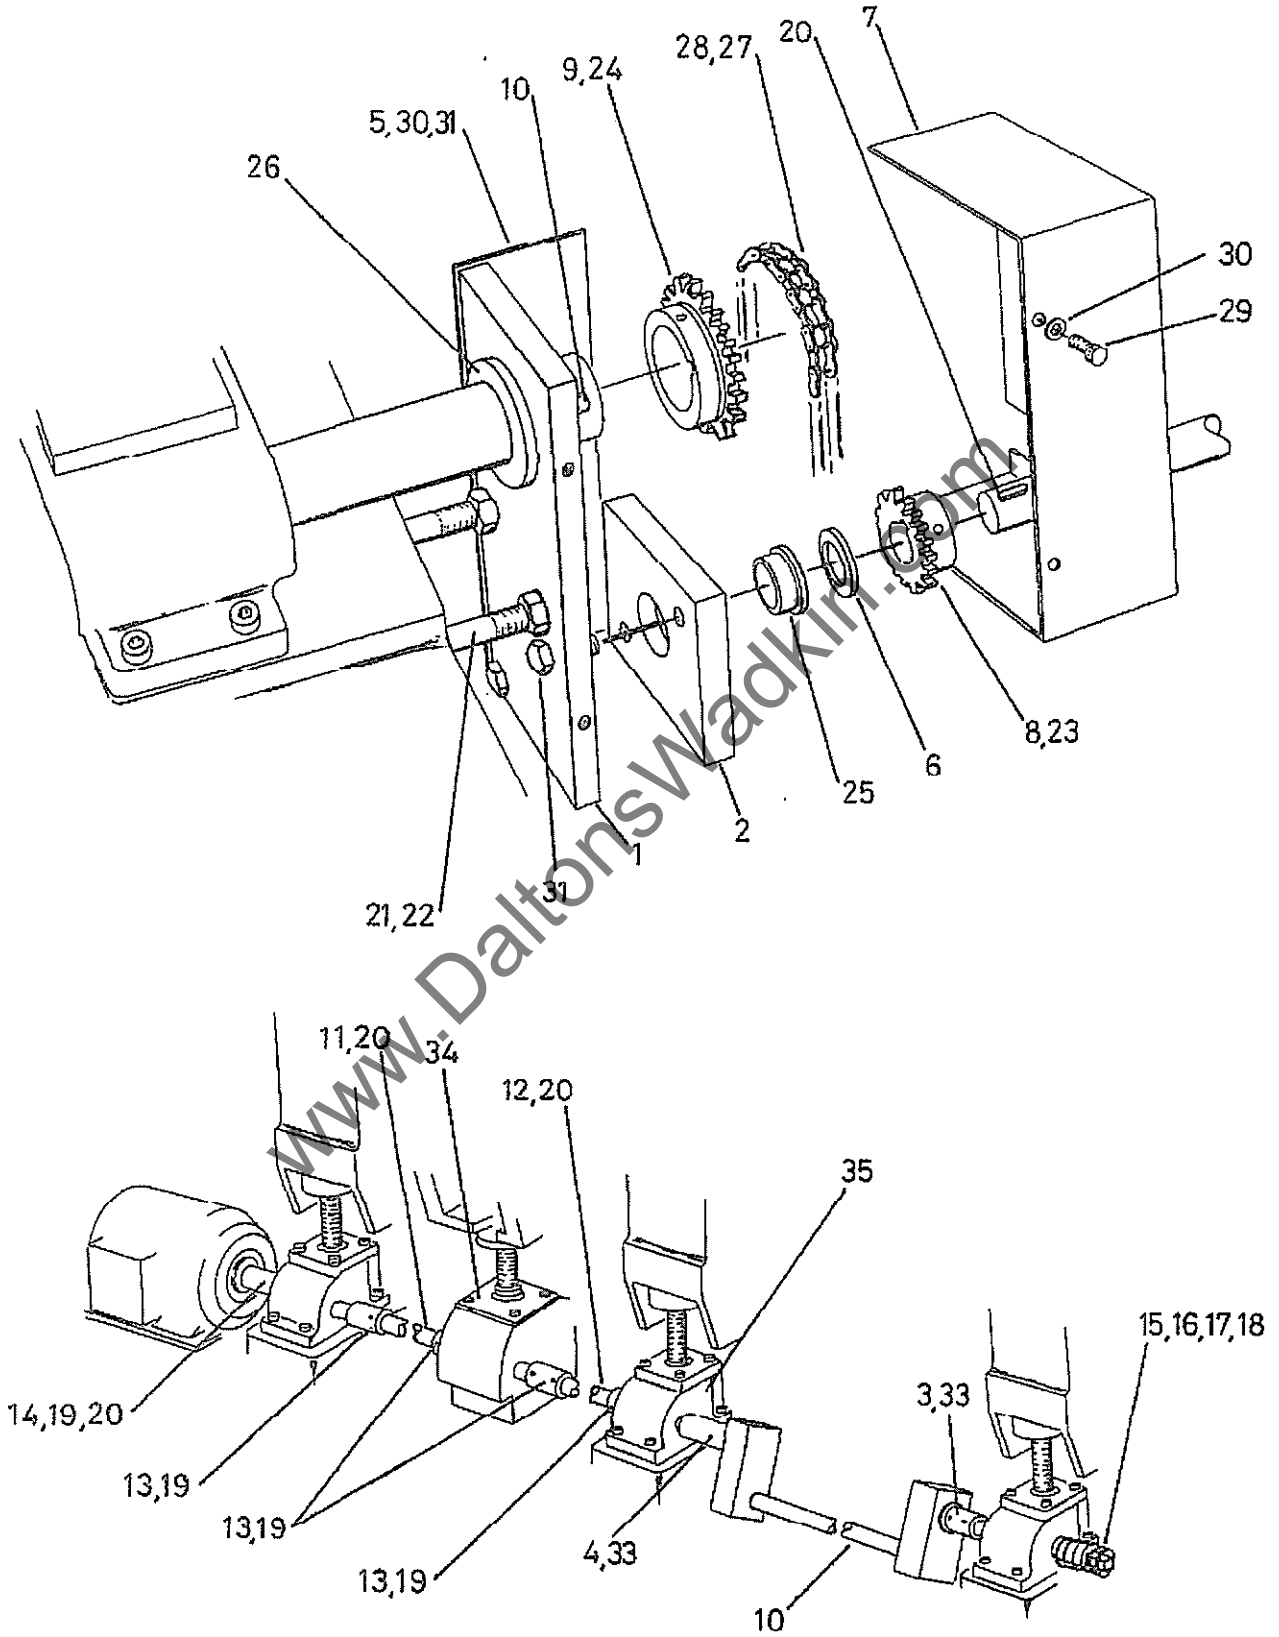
DRIVE SHAFTS TO BEAM RISE AND FALL
